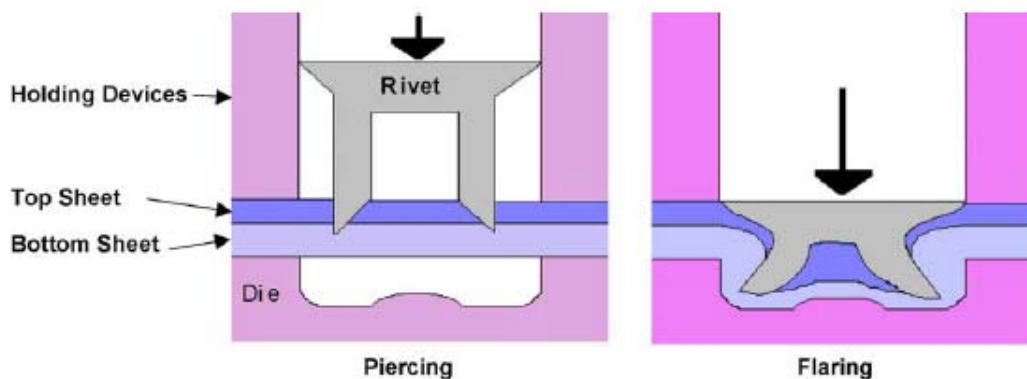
An illustration of a self-piercing riveting process in cross section view [12].
